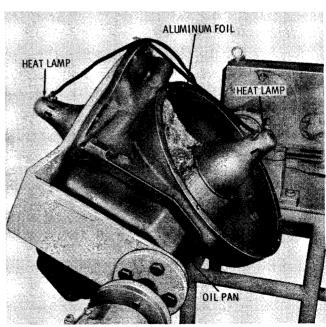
Using heat lamps to expand bearing retainer bores
